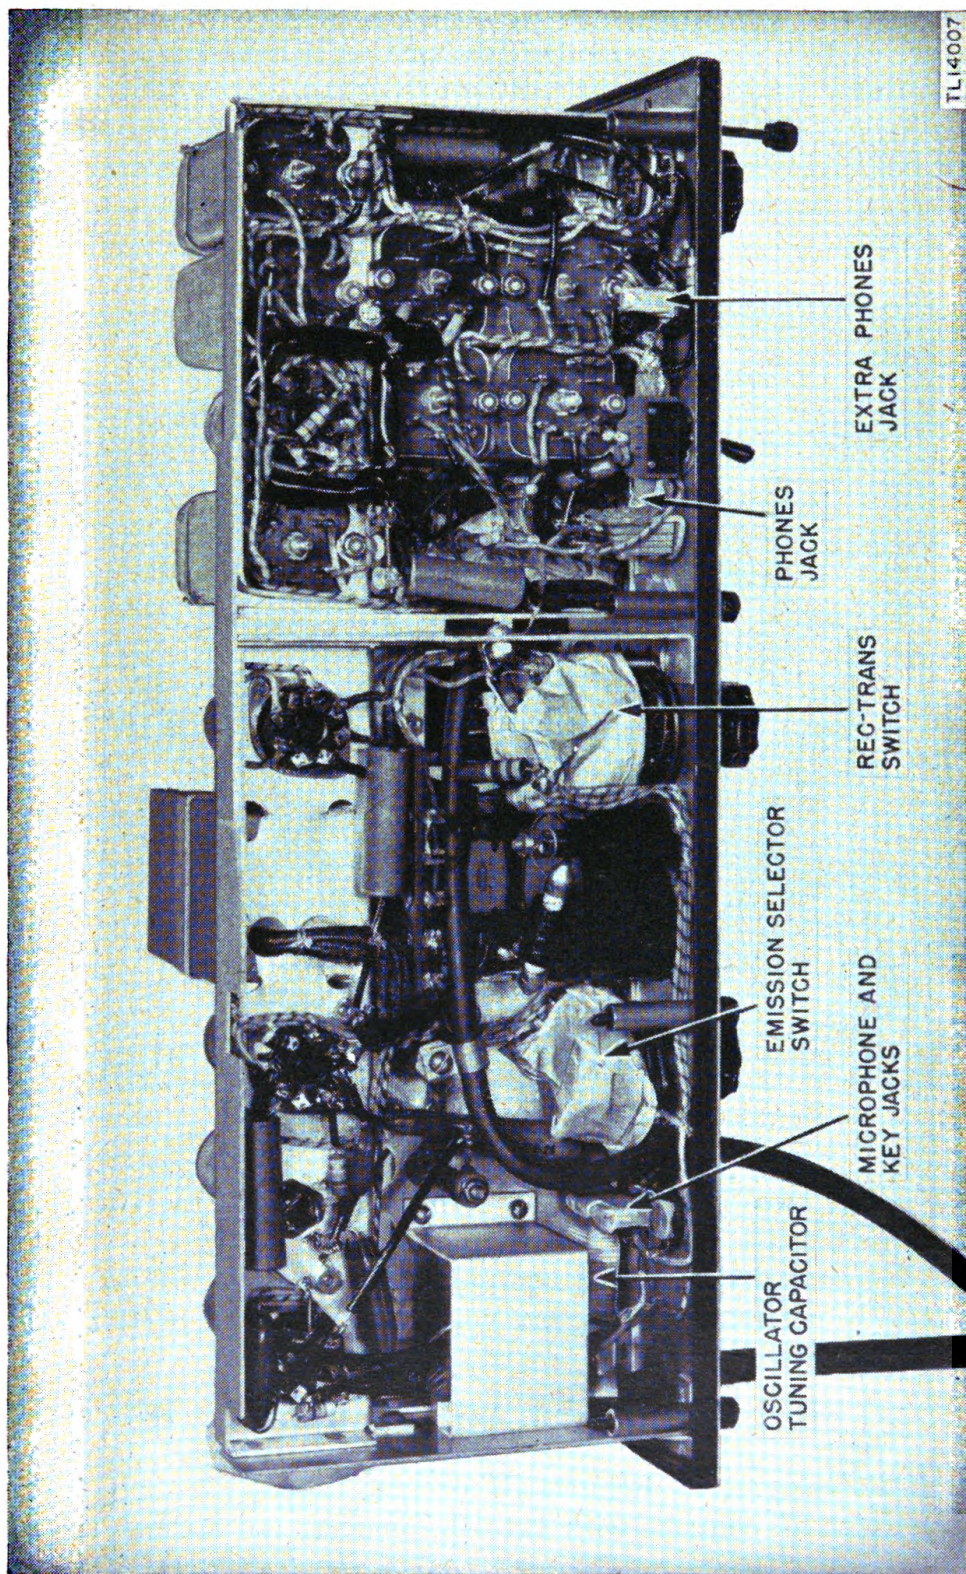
Radio receiver and transmitter BC-474-()—bottom interior view of chassis showing method of masking parts.
